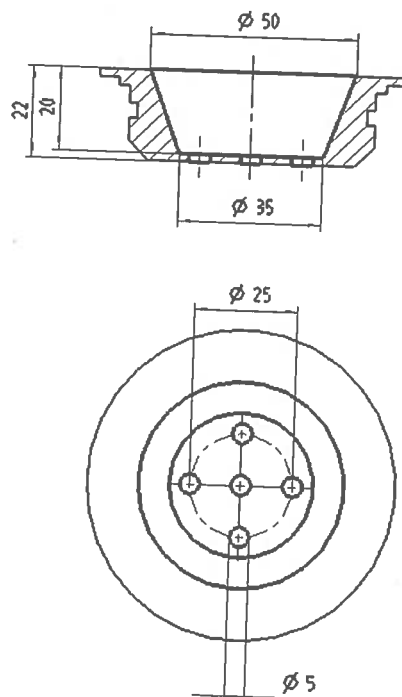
Water pipe tobacco holder (dimensional details, all dimensions in mm with a tolerance of $\pm 0,1$ mm)
